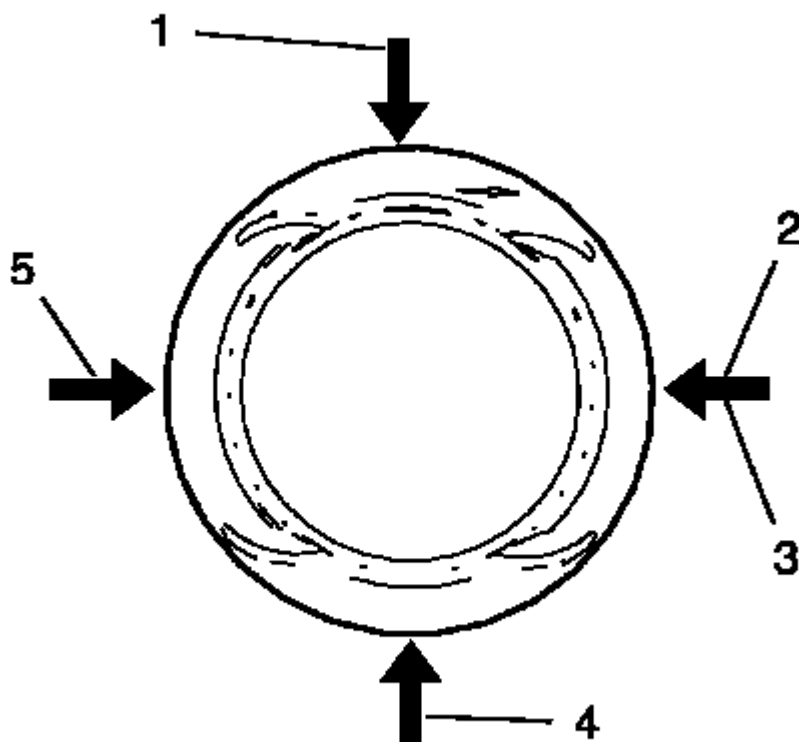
Oil Ring Joints, Lower Compression Ring Joint, Upper Compression Ring Joint And Oil Ring Spacer Joint
